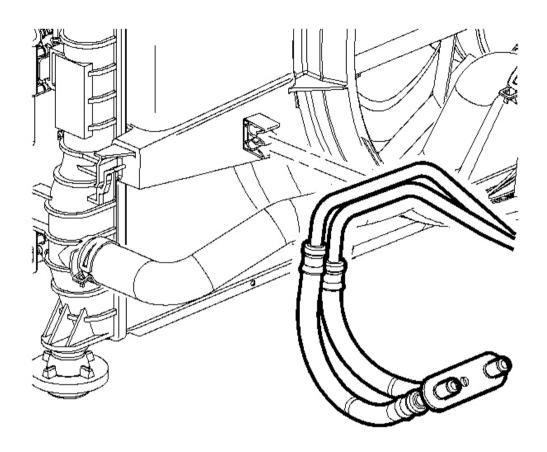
View Of Unclip Transmission Cooler Lines From The Fan Assembly Courtesy of GENERAL MOTORS CORP.
